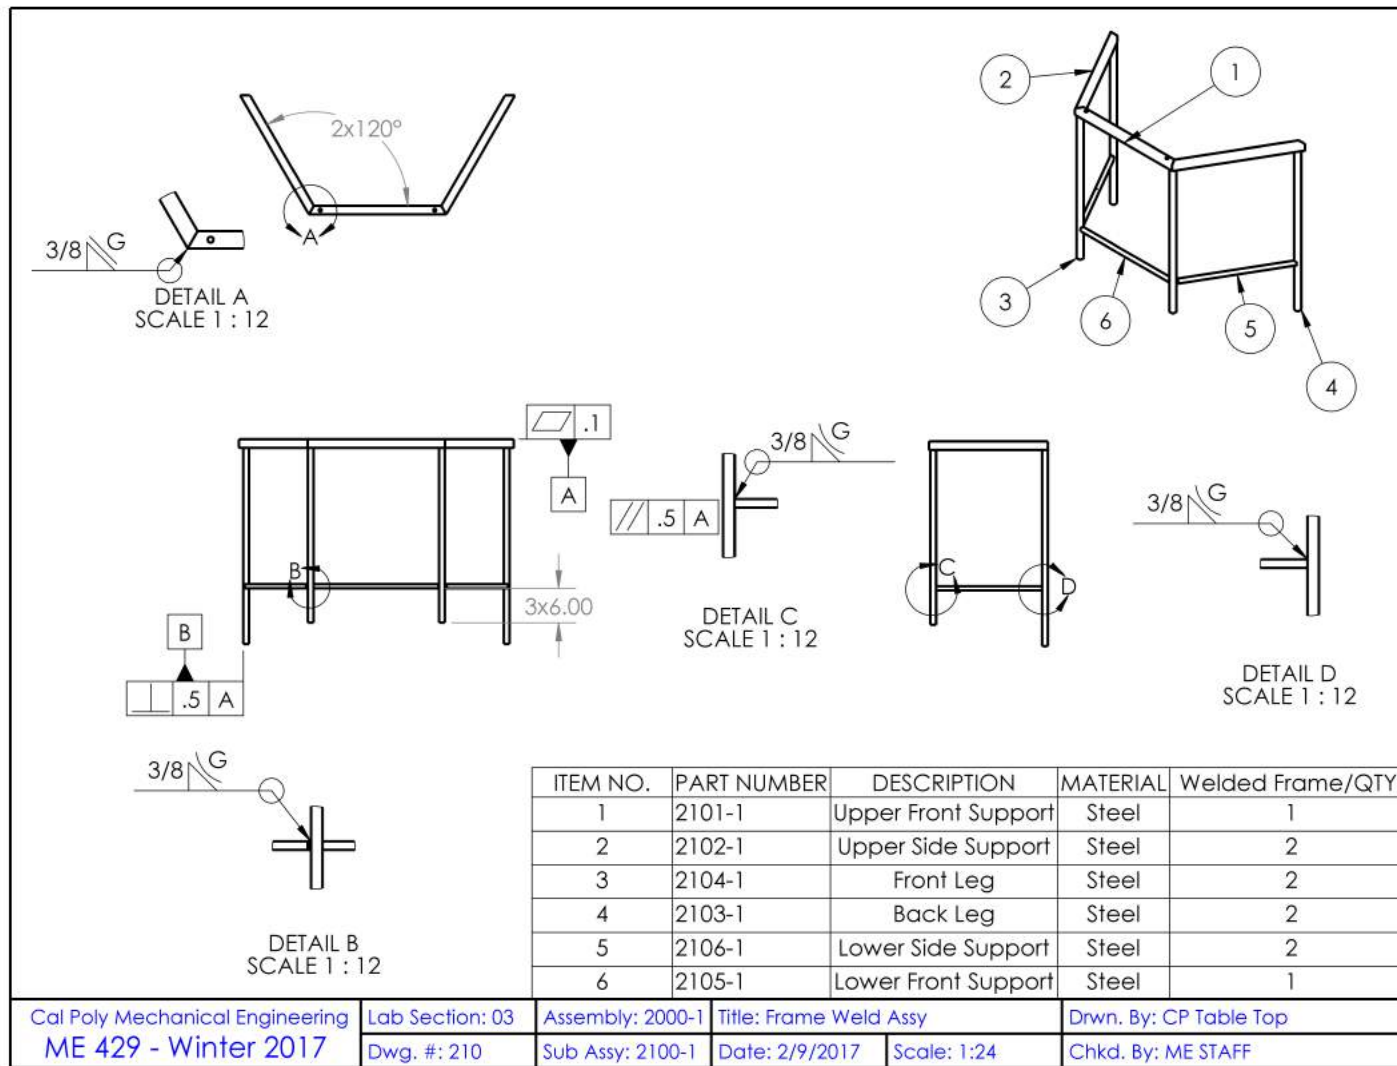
Drawing 210 - Frame Weld Assembly
